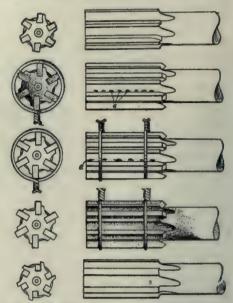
Stages in making a reamer with brazed high-speed steel blades.
